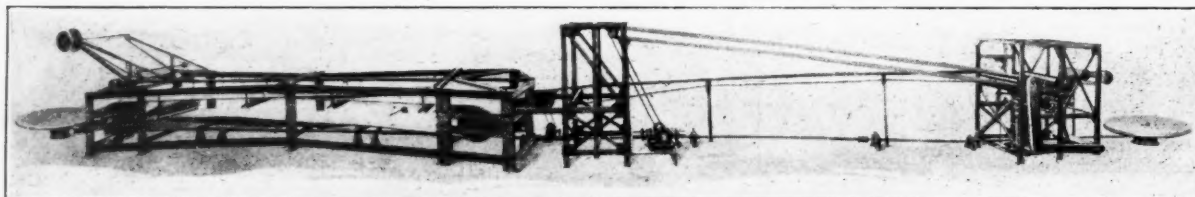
Spadone Continuous Wrapped Hose Making Machine
